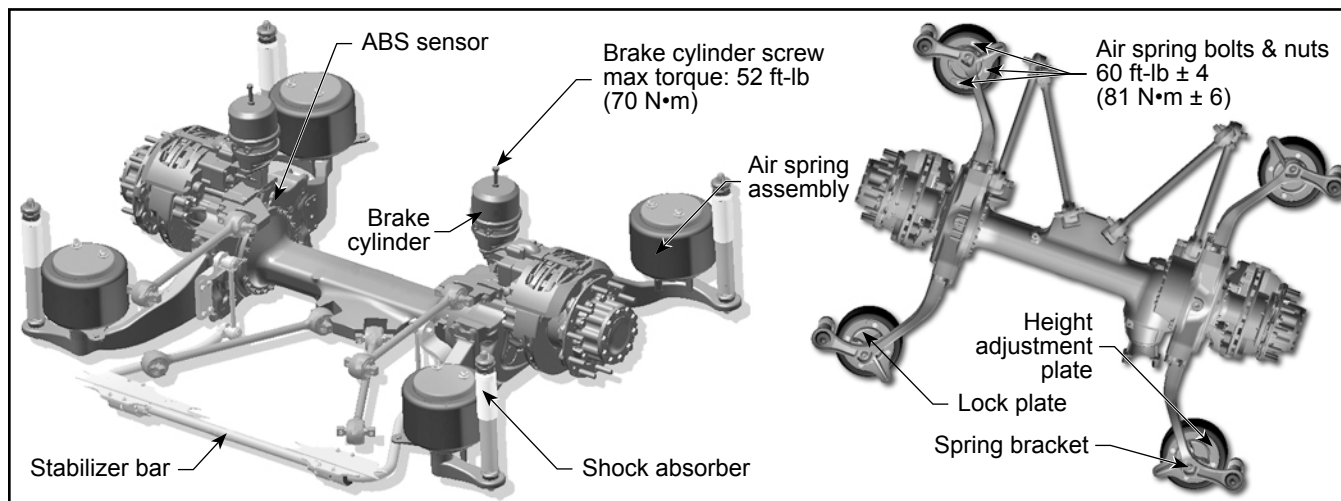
Rear Axle AV 132 (ZF) Assembly
